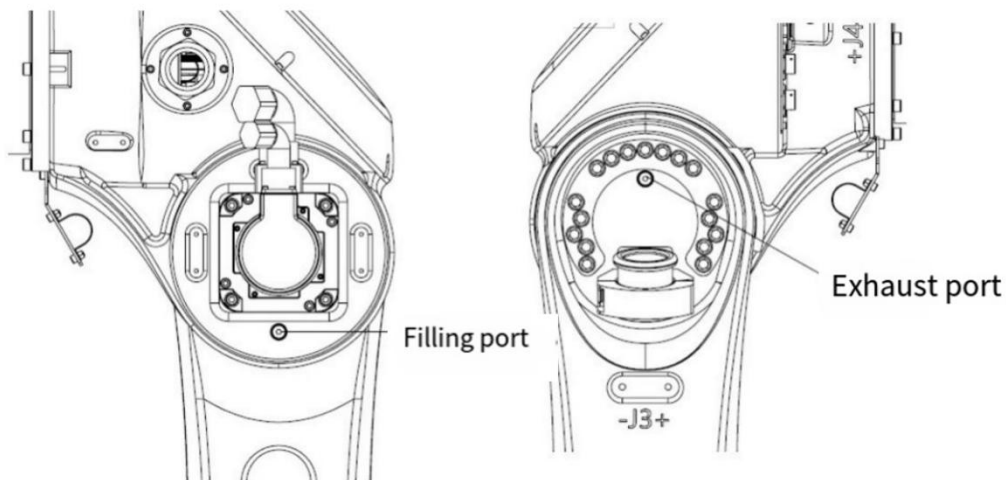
Lubricant Replacement for J3 Shaft Reducer
